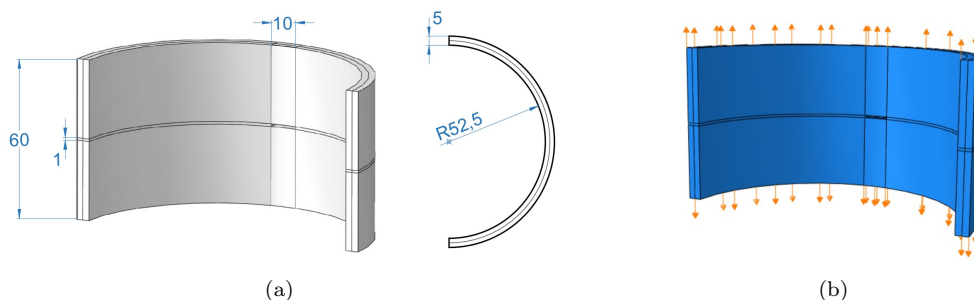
Geometry (a) and boundary conditions (b) for the cylindrical layer. The dimensions are reported in mm.
